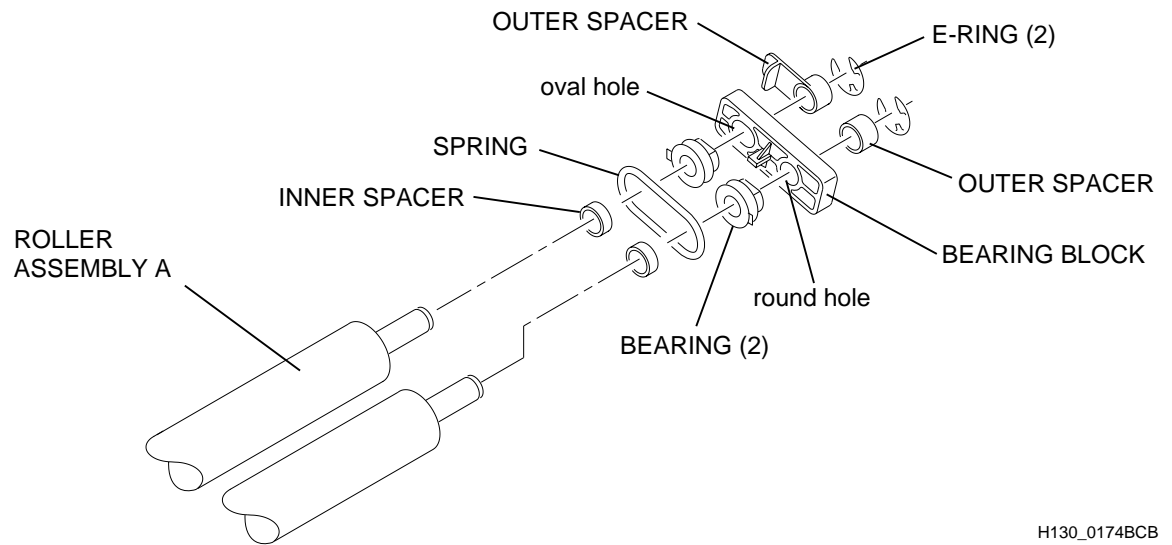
Drive End of the EXIT SQUEEGEE ASSEMBLY
